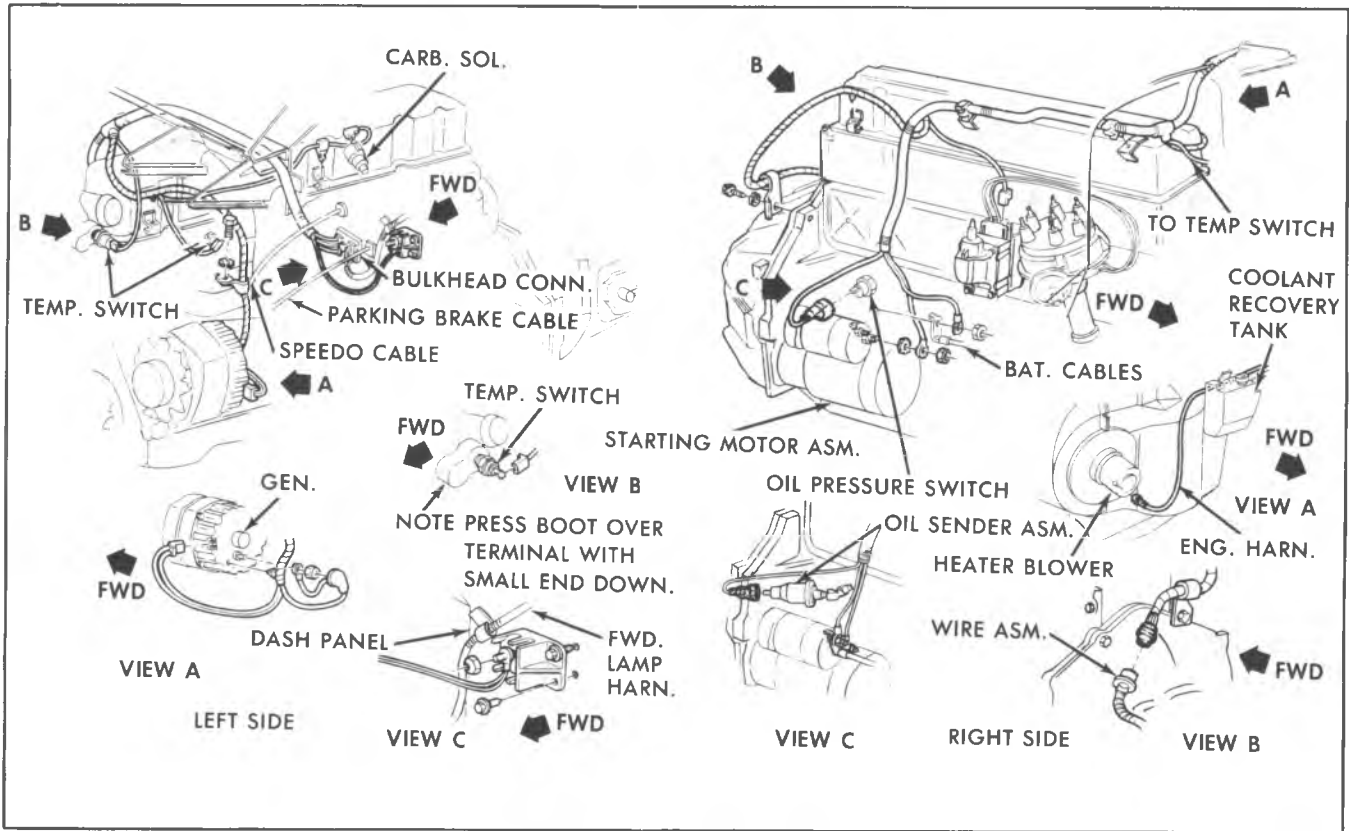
G-10 thru 30 Truck L-6 (L25) Engine Wiring
